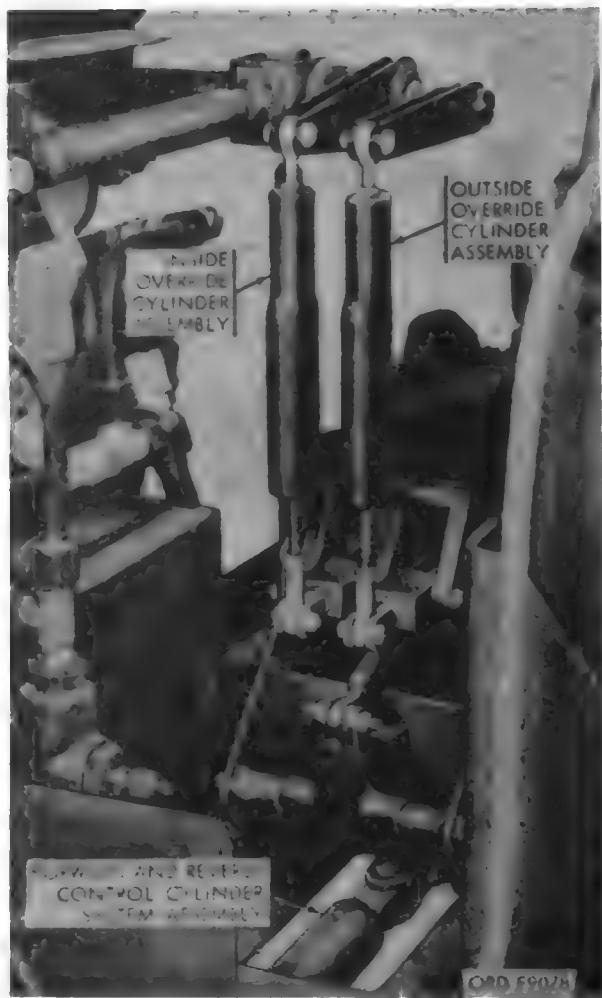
Override cylinder assemblies and control cylinder system assembly.
